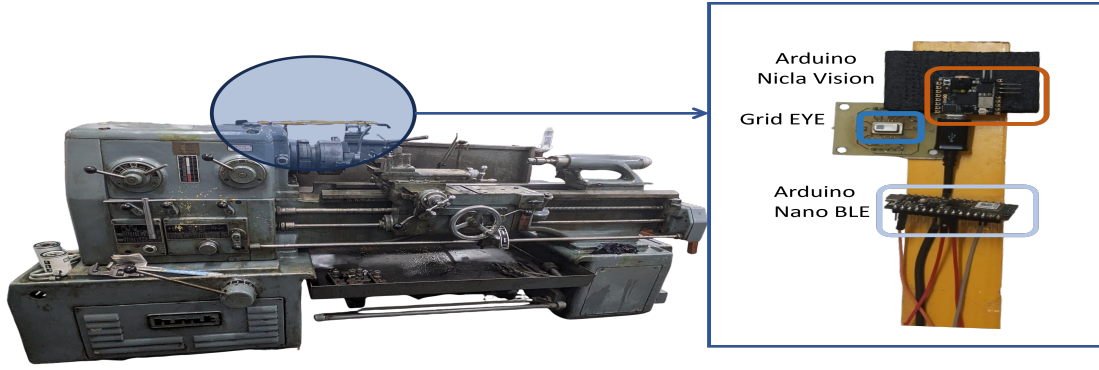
Lathe machine tool monitoring set-up comprising of infrared and camera module deployed on a legacy lathe.
